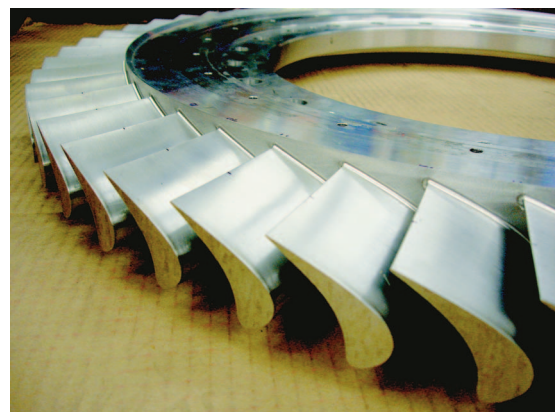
Rotor blisk of the 1.5-stage unshrouded turbine
